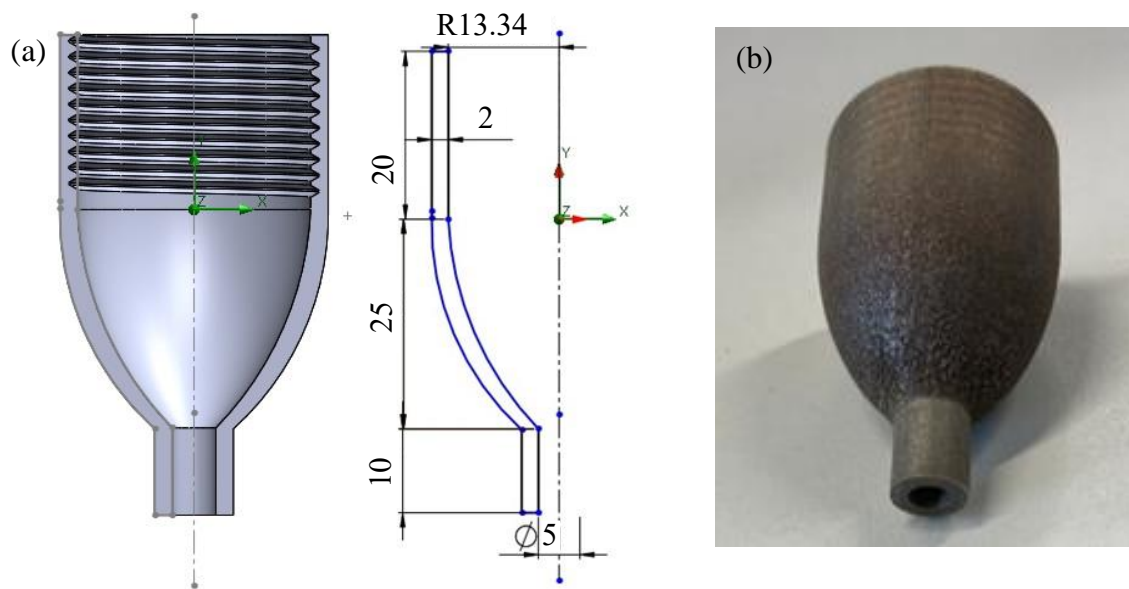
(a) CAD design of the nozzle, (b) 3D-printed steel nozzle.
